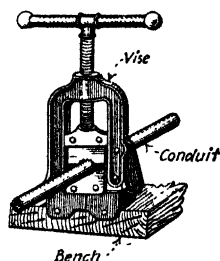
Conduit clamped in pipe vise for cutting and threading.
